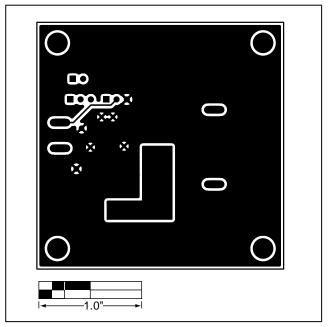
MAX668 EV Kit PC Board Layout—Solder Side
